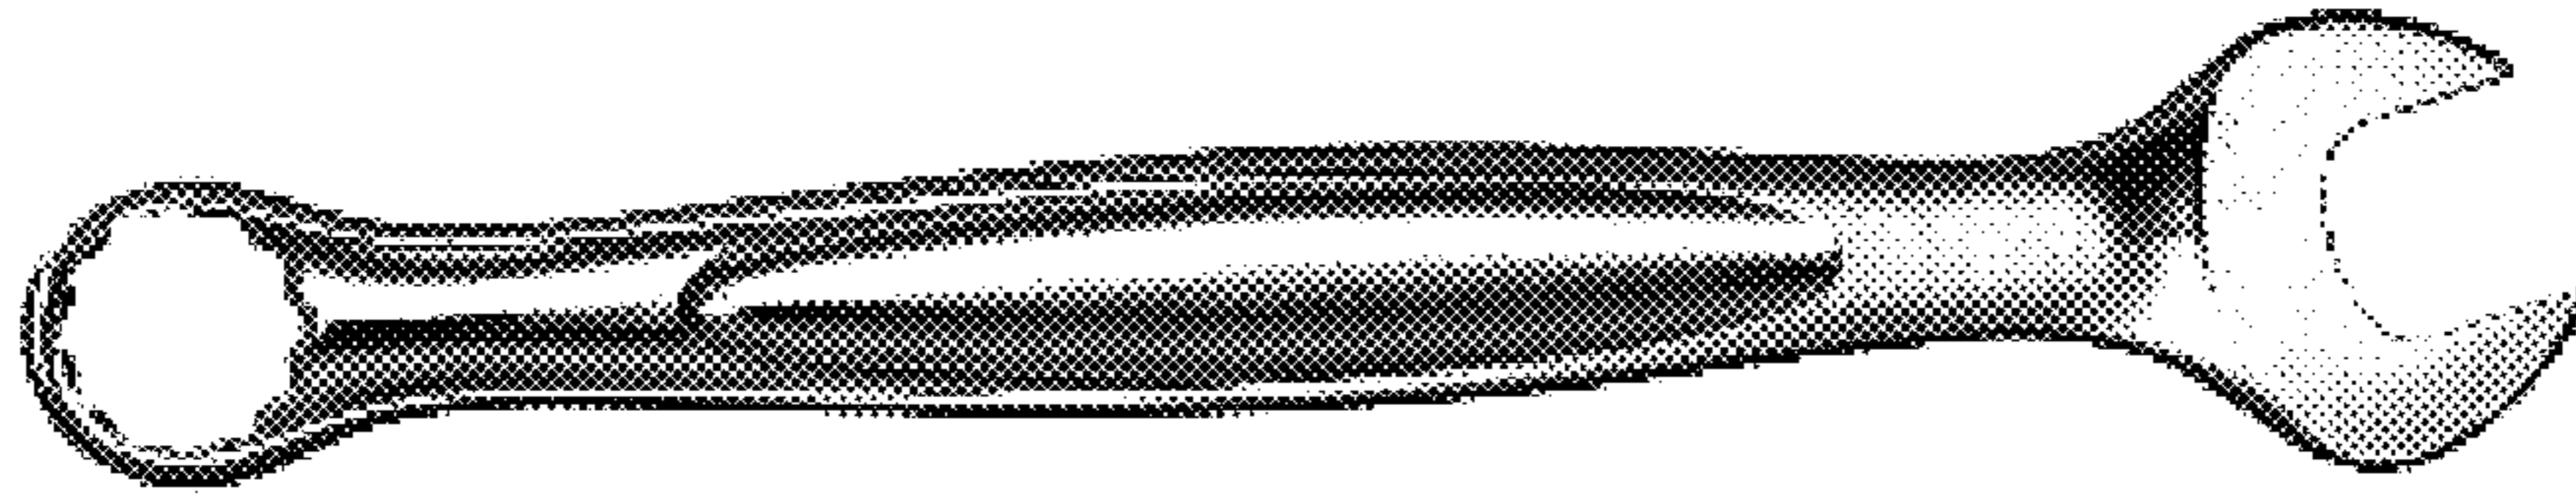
is a bottom view of the wrench shown in FIG. 1.
